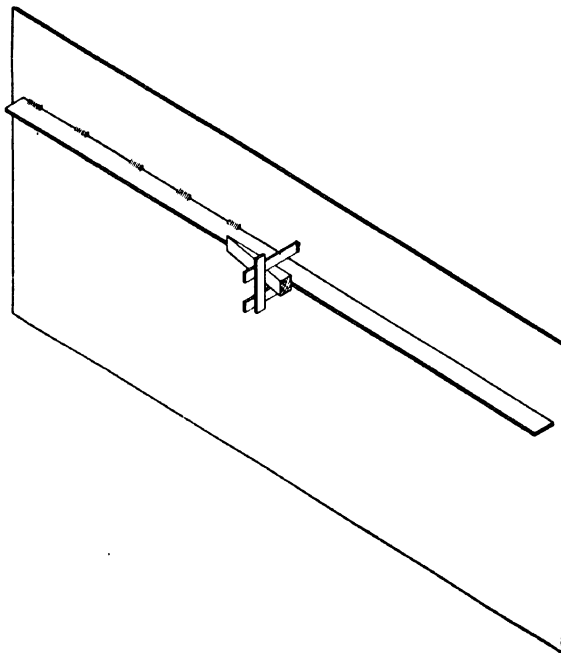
Method of installing flat-bar ribband where saddles and wedges are necessary.
